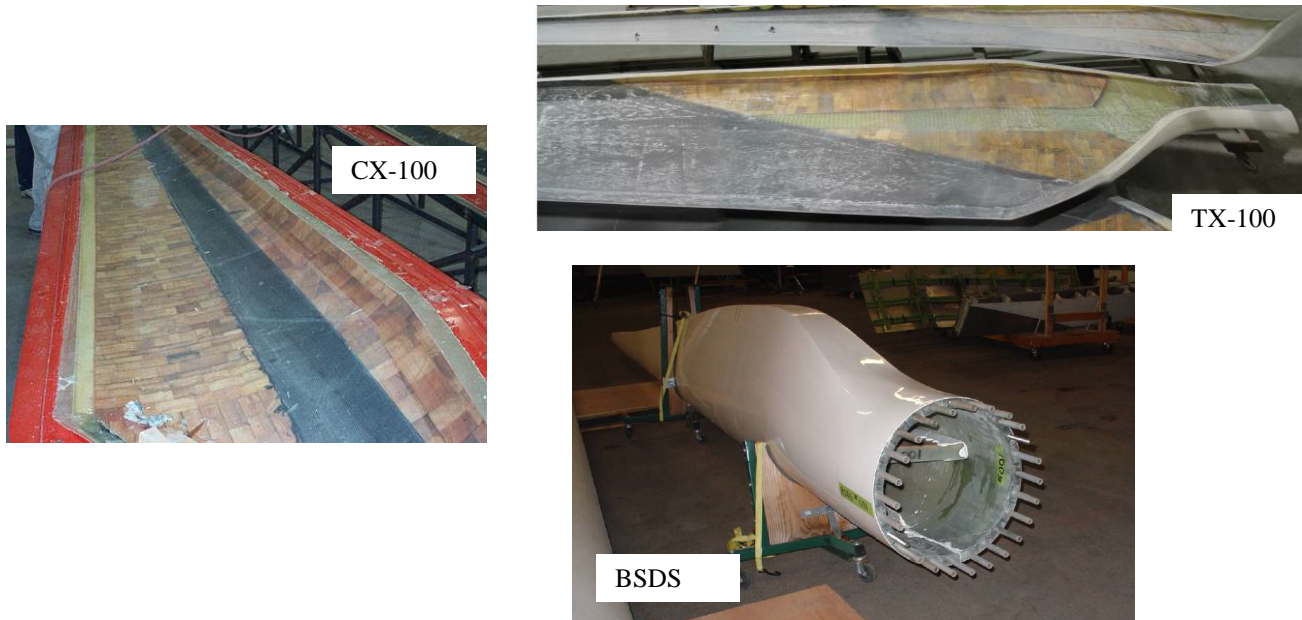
CX-100, TX-100 and BSDS Prototype Blades
